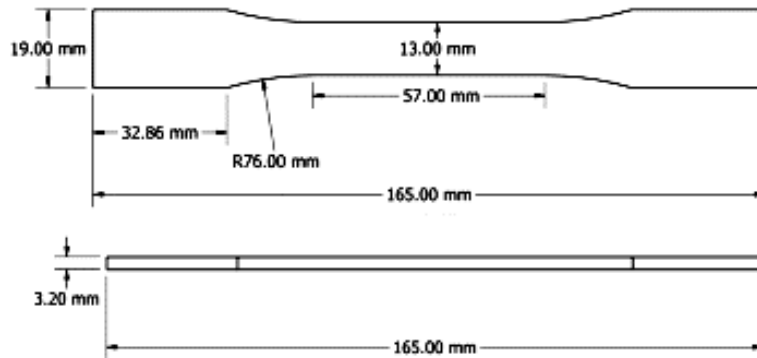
Tensile test dimension (ASTM D638 TYPE 1)
